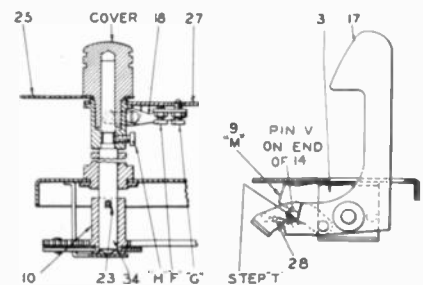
Details of record-separating knife and holder, and adjustment positions.
